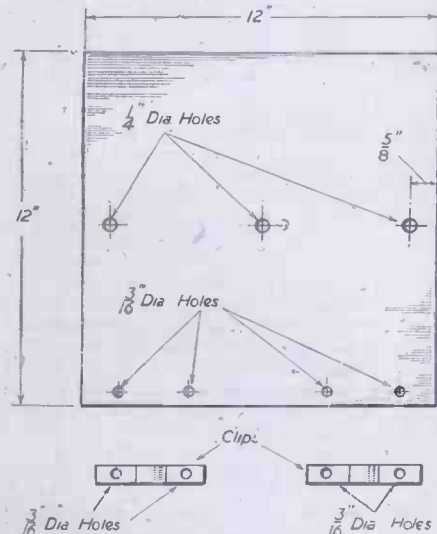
The reflector plate drilled for the fitting of heating cone and flame-guard, and also showing fixing clips.
